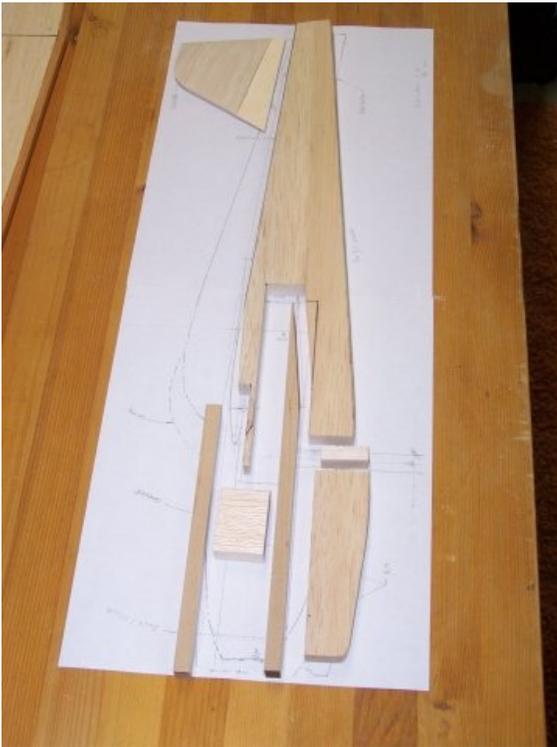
(3828) Parts for the main fuselage assembly laid over design sketch. Having a real drawing would have sped things up considerably. Note that the upper fuselage section is missing in this view, but you can see the assembled rudder made from plywood with balsa skins. Balsa nosepiece at the front of the engine mounts is also missing.
